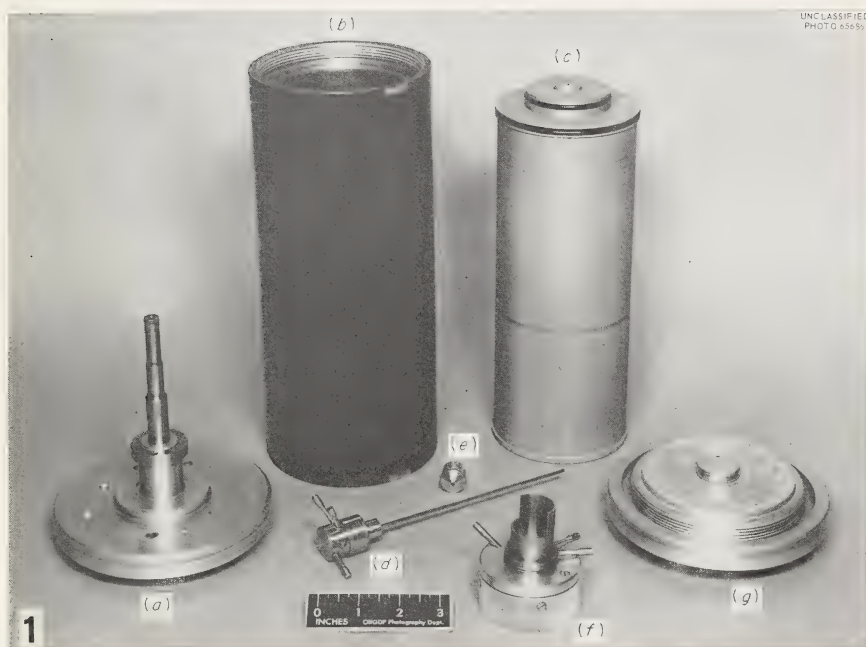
Disassembled B-V rotor system: (a) upper end cap; (b) rotor chamber; (c) rotor core; (d) seal; (e) manifold plug; (f) upper bearing; (g) lower end cap.
